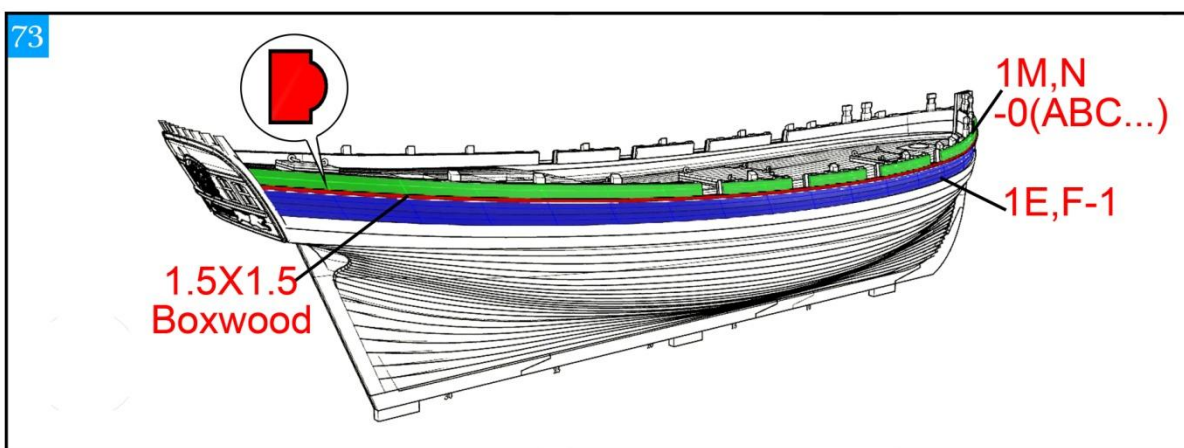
The outer bulwark planking, gunwales, and decorative strip are installed as shown.
